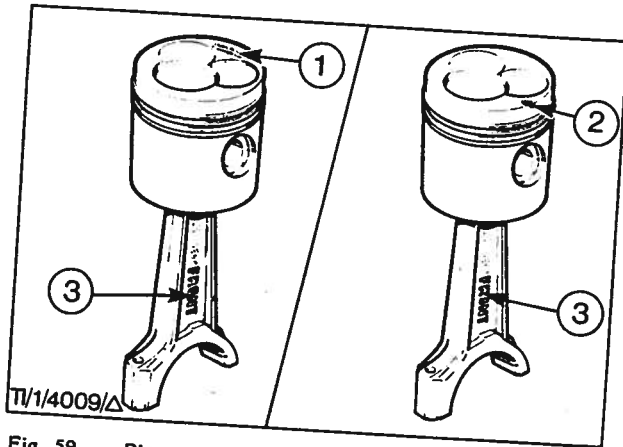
Piston and Connecting Rod 'Fitting' Marks (Towards Front of Engine)
